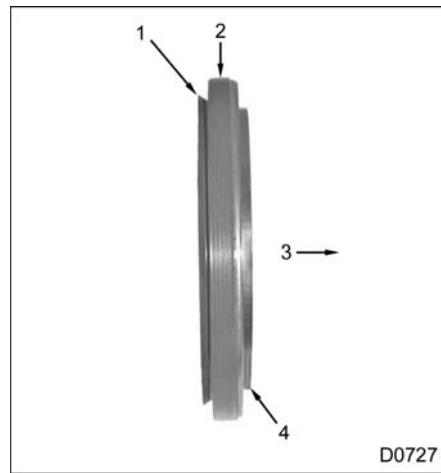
Orientation of crankshaft rear oil seal and wear sleeve
